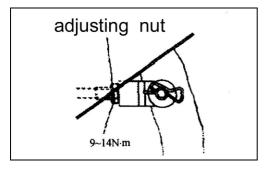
(4)Measure the clutch pedal clevis pin play see Fig.11-129.
